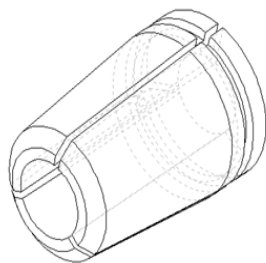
(c): FINAL JOB(120°×3nos) IN CAD
